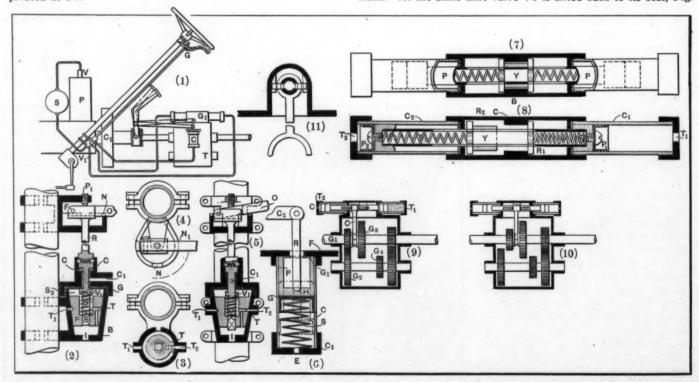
General arrangement of Irish gear. Fig. 2—Method of attaching distributing valve to steering post. Fig. 3—Section through valve and post. Fig. 4—Operating lever and notches. Fig. 5—Lifting lever for shifting the gears. Fig. 6—Clutch operating mechanism. Fig. 7—Gear operating mechanism when gears are in normal. Fig. 8—Shifting gears by admission of gas through T. Fig. 9—How mechanism operates transmission gears. Fig. 10—Gears in neutral
